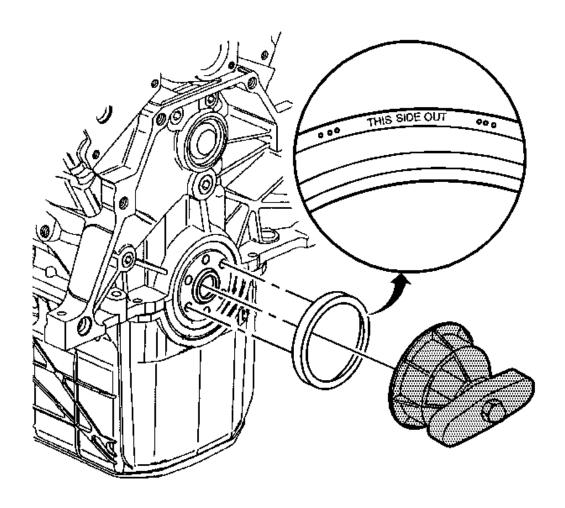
Installing Crankshaft Rear Oil Seal Courtesy of GENERAL MOTORS CORP.
